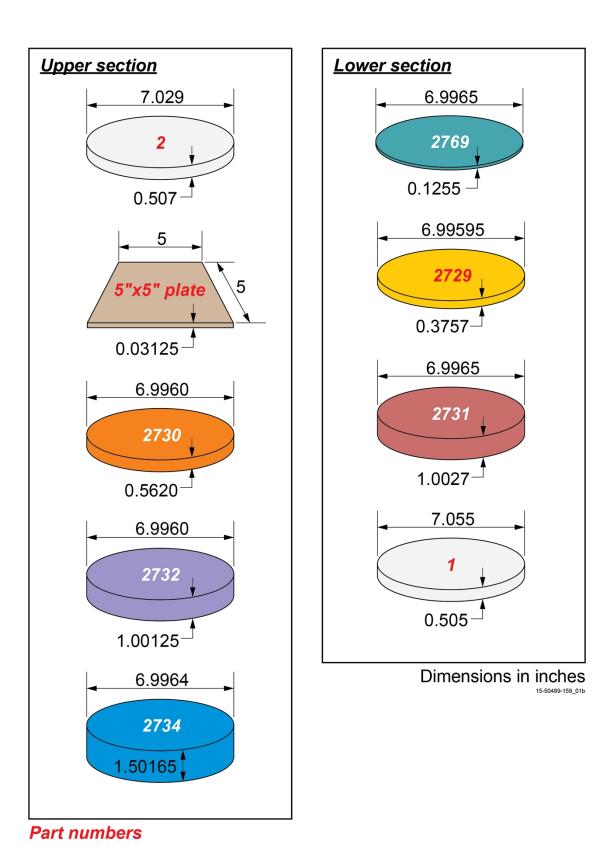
Description of the uranium metal and steel parts for the experiment with 0.5 in. thick top and bottom reflectors. Measured thickness of the stainless steel was 0.507 in. on top and 0.505 in. on bottom; the 0.375 in. diameter holes in the uranium metal cylinders are not shown
